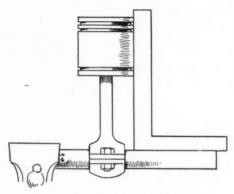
Testing piston alignment with straight edge placed on mandrel held in vise
